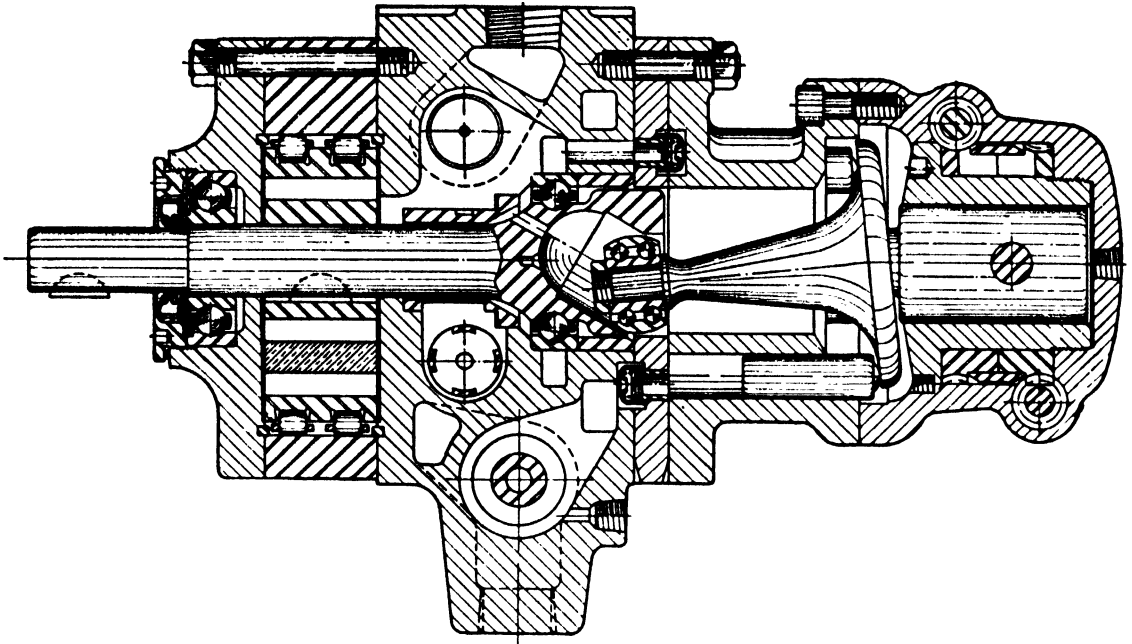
Sectional view of PWX pumping unit. (*Sundstrand Machine Tool Co., Rockford, Ill.*)
